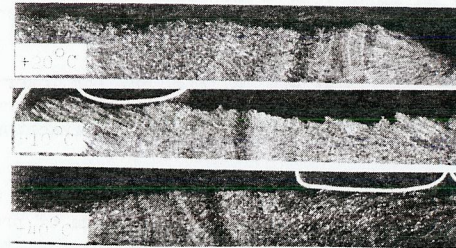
Fracture surface in Weld Metal I. 4x
